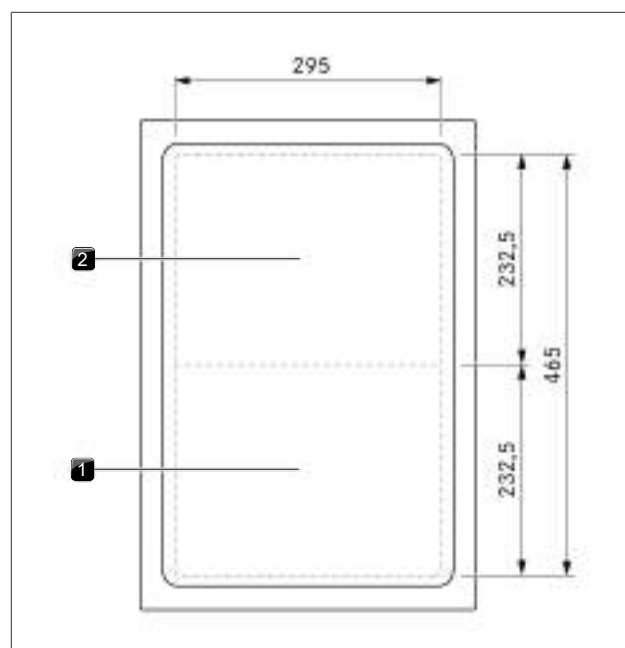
Layout of Tepan stainless steel grill PKT3 and cooking zone dimensions
